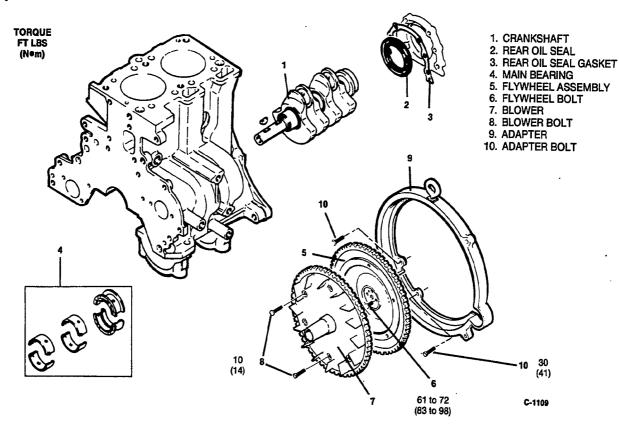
CRANKSHAFT, FLYWHEEL, BLOWER, ADAPTER
